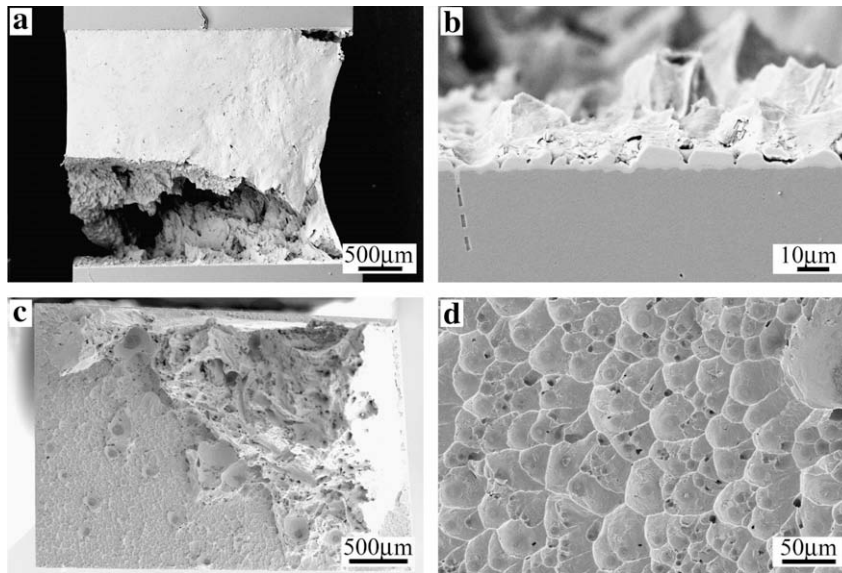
Tensile fracture morphologies of SnCu/Cu joint with thick solder: (a) and (b) cross-section of the fracture; (c) and (d) the top view of fracture surface.
